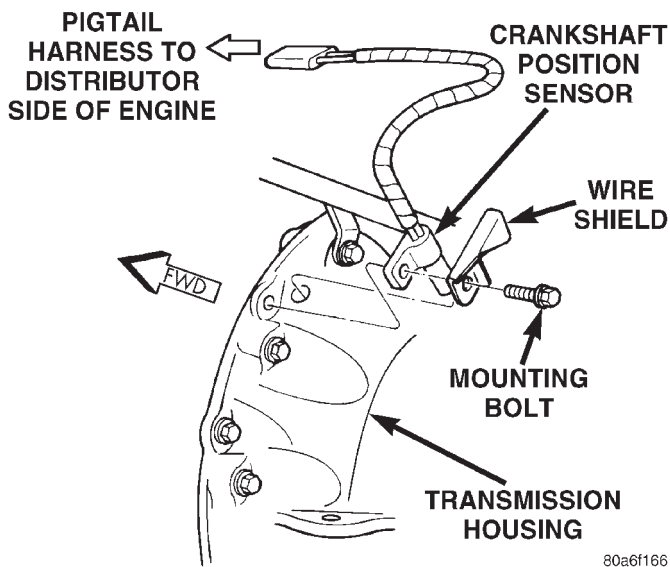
Crankshaft Position Sensor—4.0L Engine
